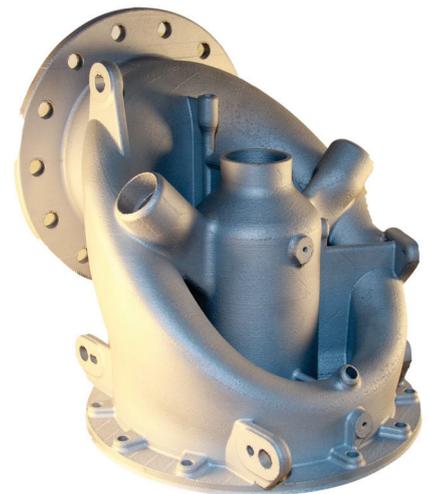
Manifold 3D-printed using L-PBF with Scalmetalloy.
